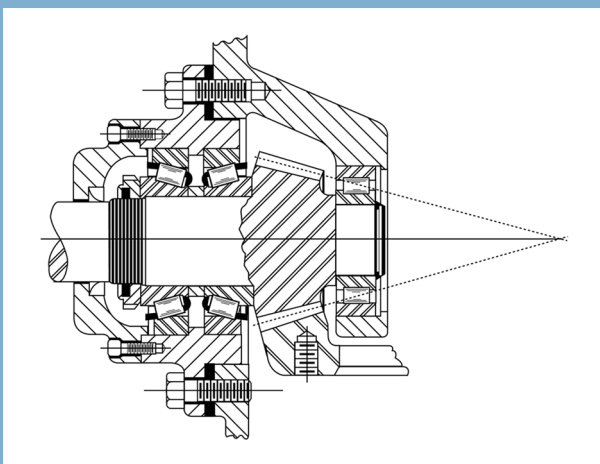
Straddle pinion mounting for short shafts showing use of combined thrust and radial bearings. Gear mounted in oil-tight case.
